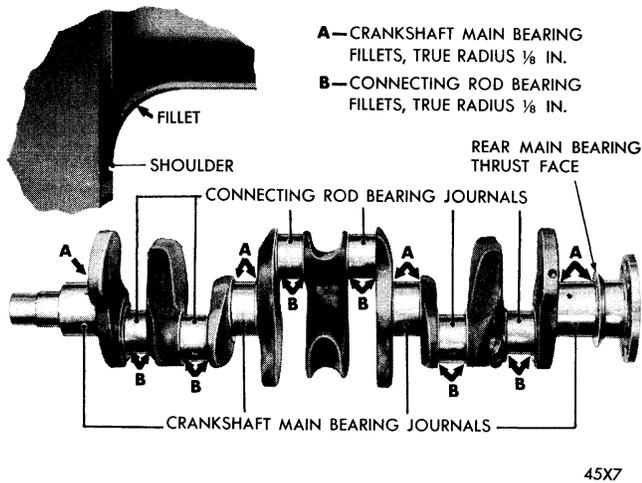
Crankshaft and Connecting Rod Bearing Fillets—6 Cylinder Engine
